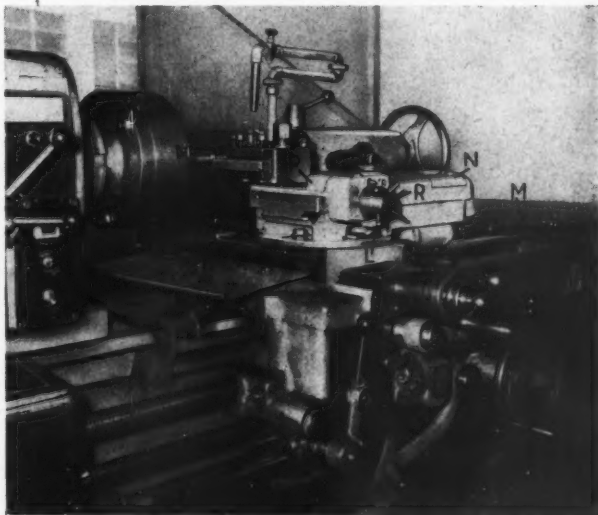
An IMOR type MVN lathe equipped with a Filematic thread-chasing unit, for cutting threads on adjusting screws of SAE 8620 steel
